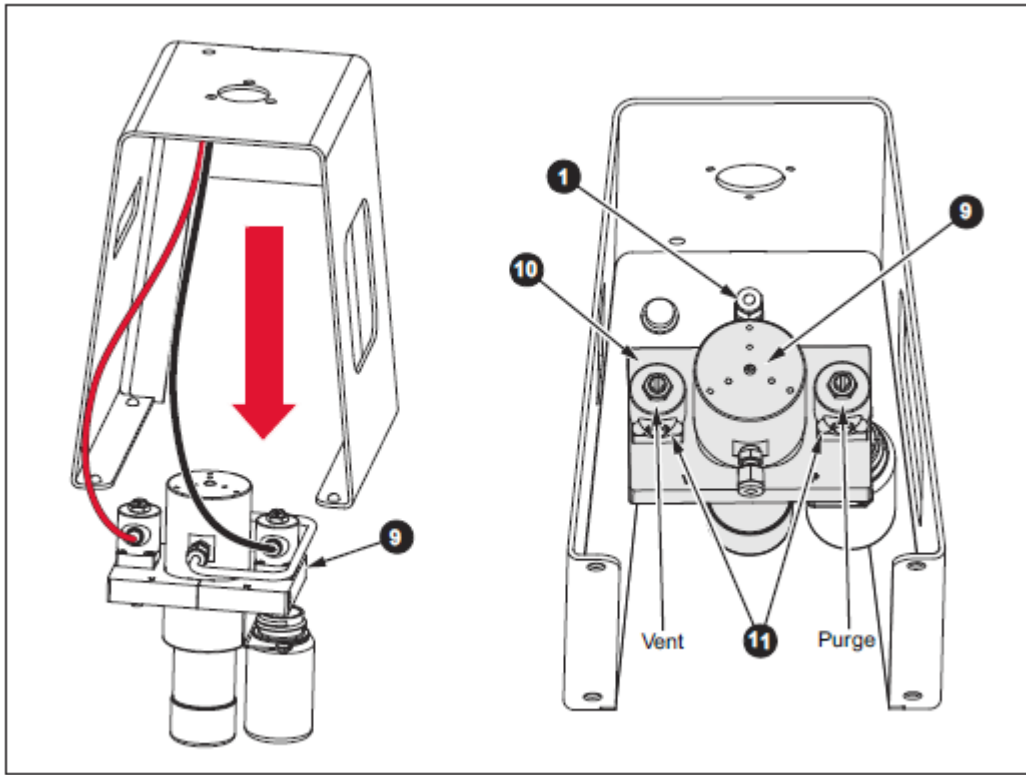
Housing Removal, and Vent and Purge Valve Identification
